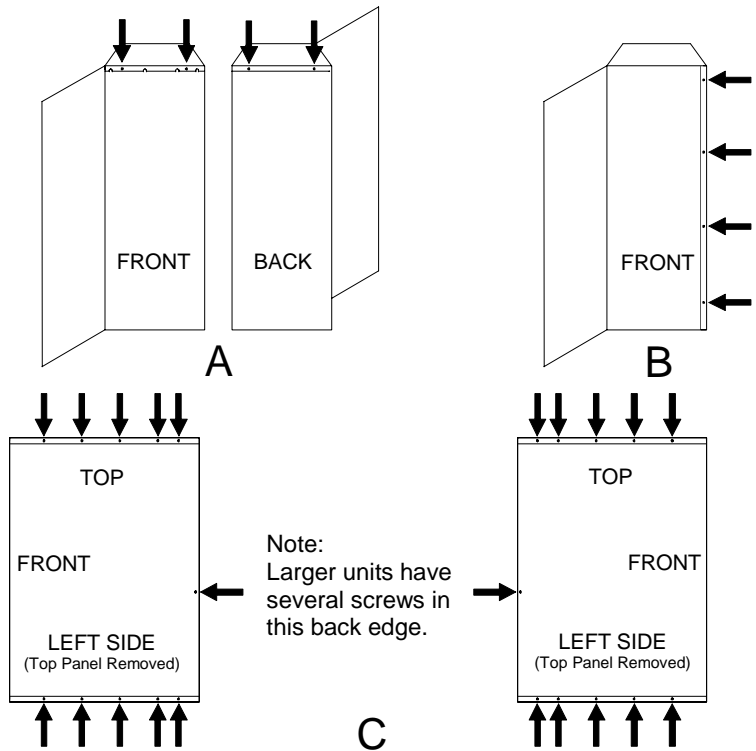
Top and Side Panels – Single Bay Model Shown
